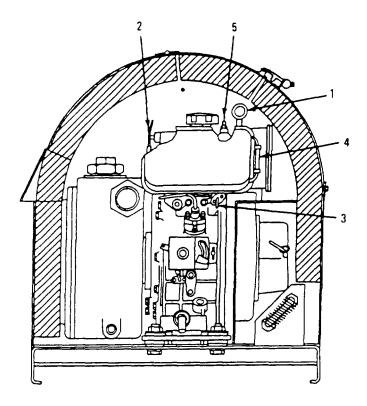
Operator's View of Internal Controls and Indicators (Front Sound Enclosure Panel Removed).
